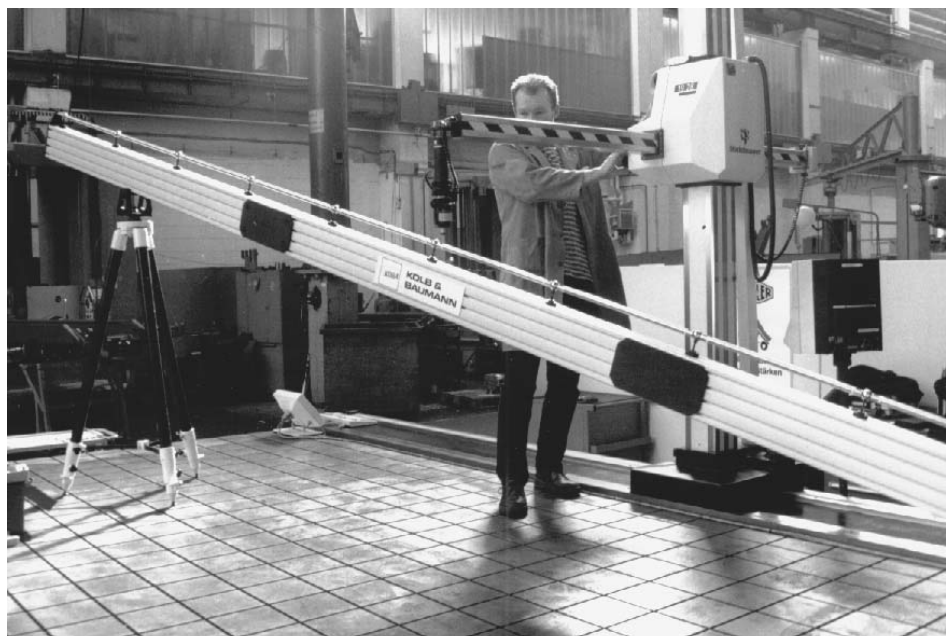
Checking of a CMM with the KOBA-Ball Bar of the first generation
